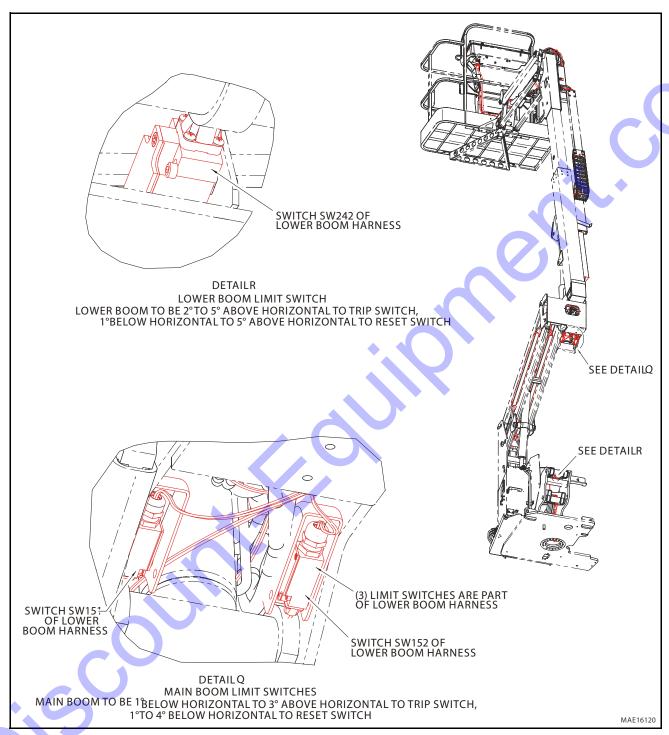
Cable Installation and Identification - Sheet 5 of 8
